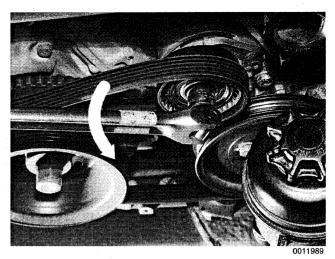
Engine drive belt tensioner being released on M44 engine. Pry off tensioner cover and then lever tensioner in counterclock-wise direction (as facing engine) and slip belt off pulleys.
